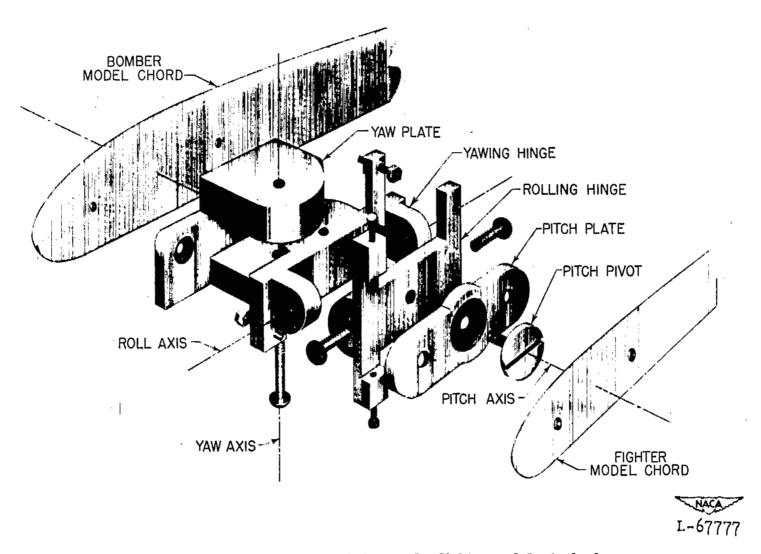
Attachment hinge used to couple fighter models to bomber.
